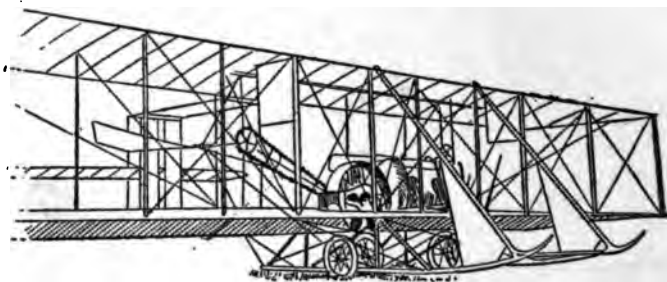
A GYRO ENGINE MOUNTED IN A WRIGHT BIPLANE
